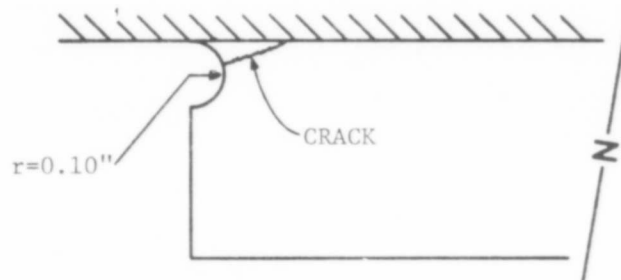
End View of Analogue Motor Showing Crack in Area of End Configuration
